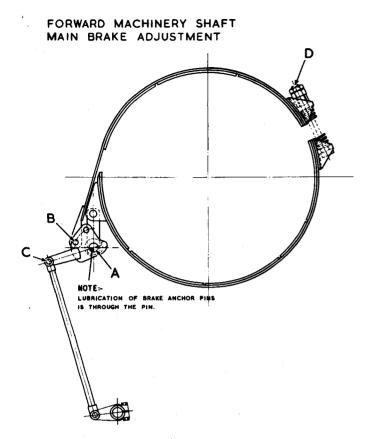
Forward Drum Brake Arrangement for Dragline, Cambered Boom Dragshovel, Clamshell, Crane or Pile Driver.
